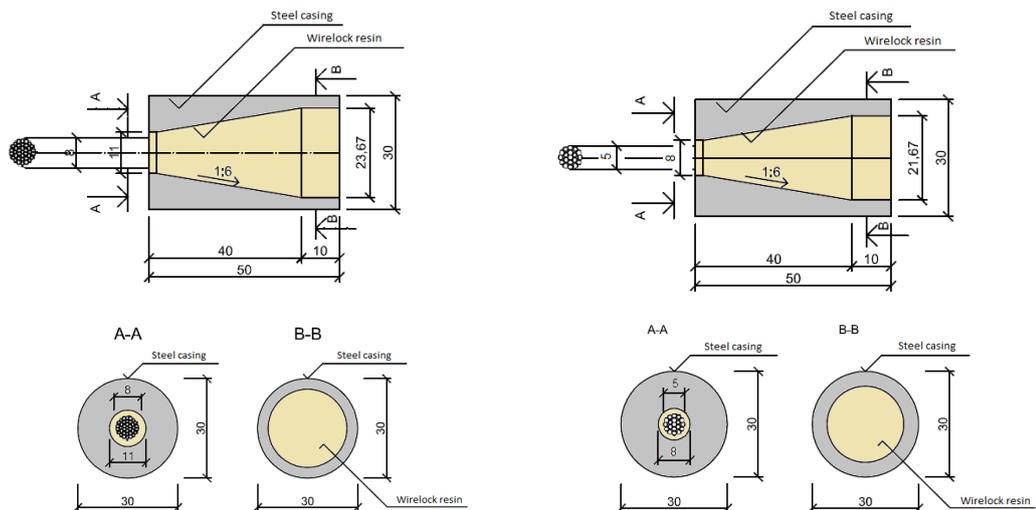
Fitting end of the cables - diameter of wire ropes 8 mm a 5 mm
